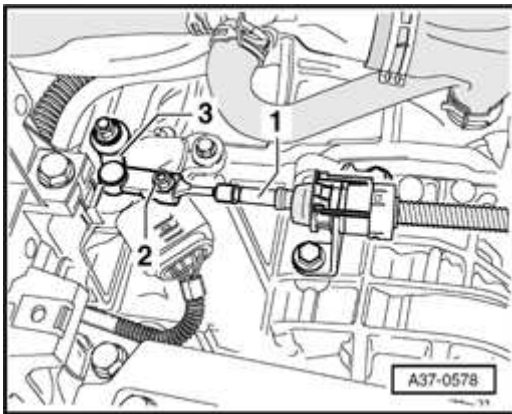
Identifying Selector Lever Cable At Transmission Side
